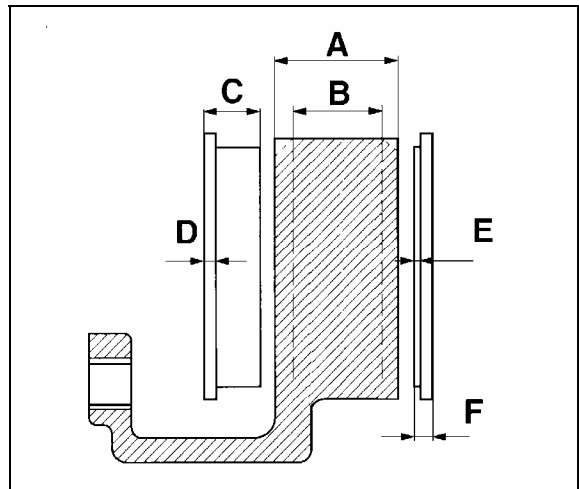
ROTOR AND PAD WEAR LIMITS
